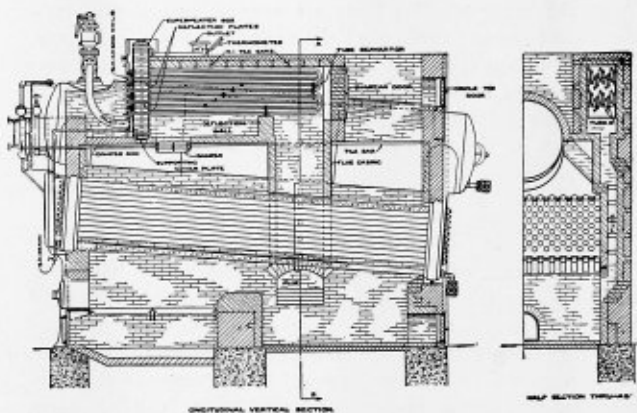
SECTIONAL DRAWINGS OF HEINE BOILER AND SUPERHEATER
